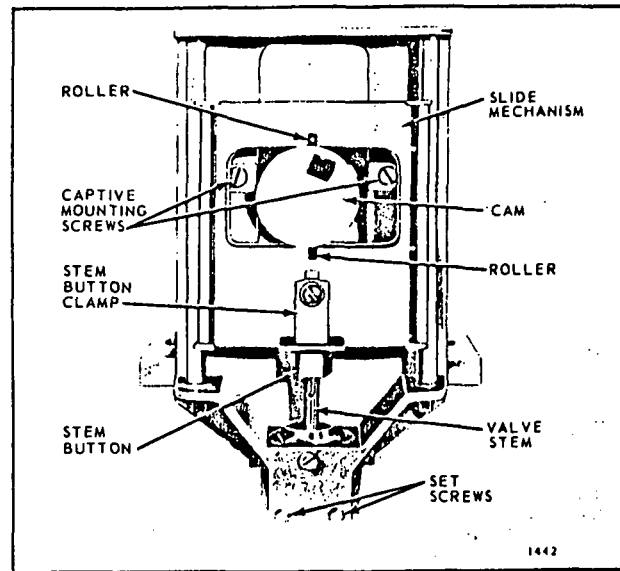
INTERNAL PARTS OF THE Q618 VALVE LINKAGE.
